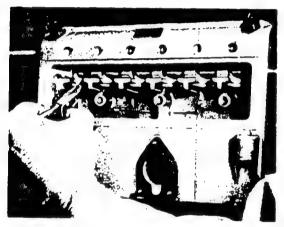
Replace cross pin in rod in such a way that centre mark of pin engages with ball of rod
